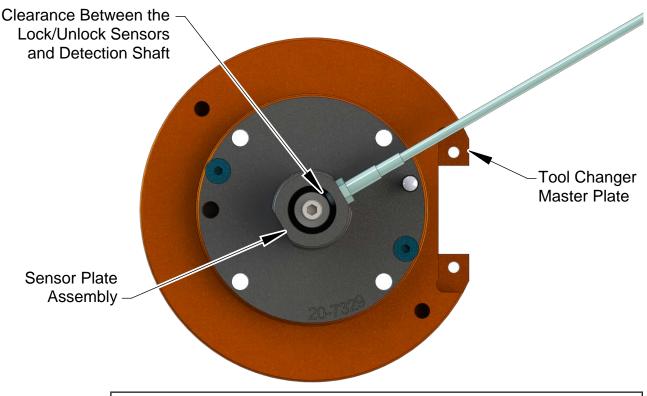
Verify Sensor and Detection Shaft Clearance
